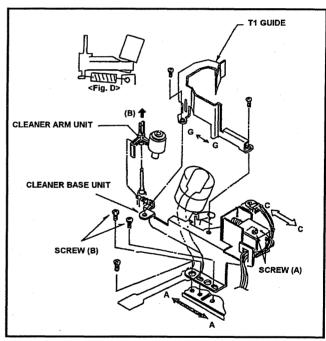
Cleaner Solenoid Position Adjustment
